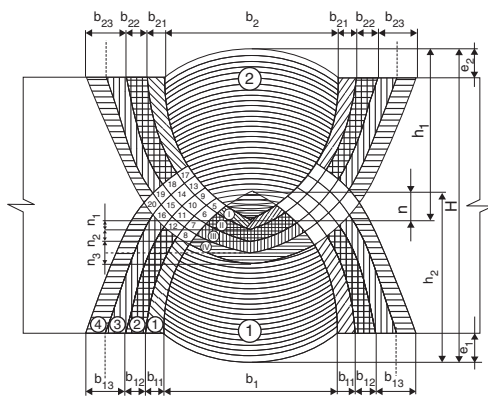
Sketch of the welded joint of double sided SAW
